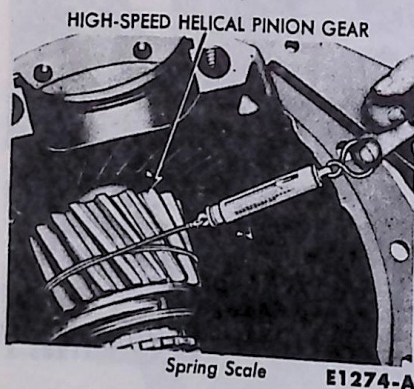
Checking Cross Shaft Bearing Pre-Load
